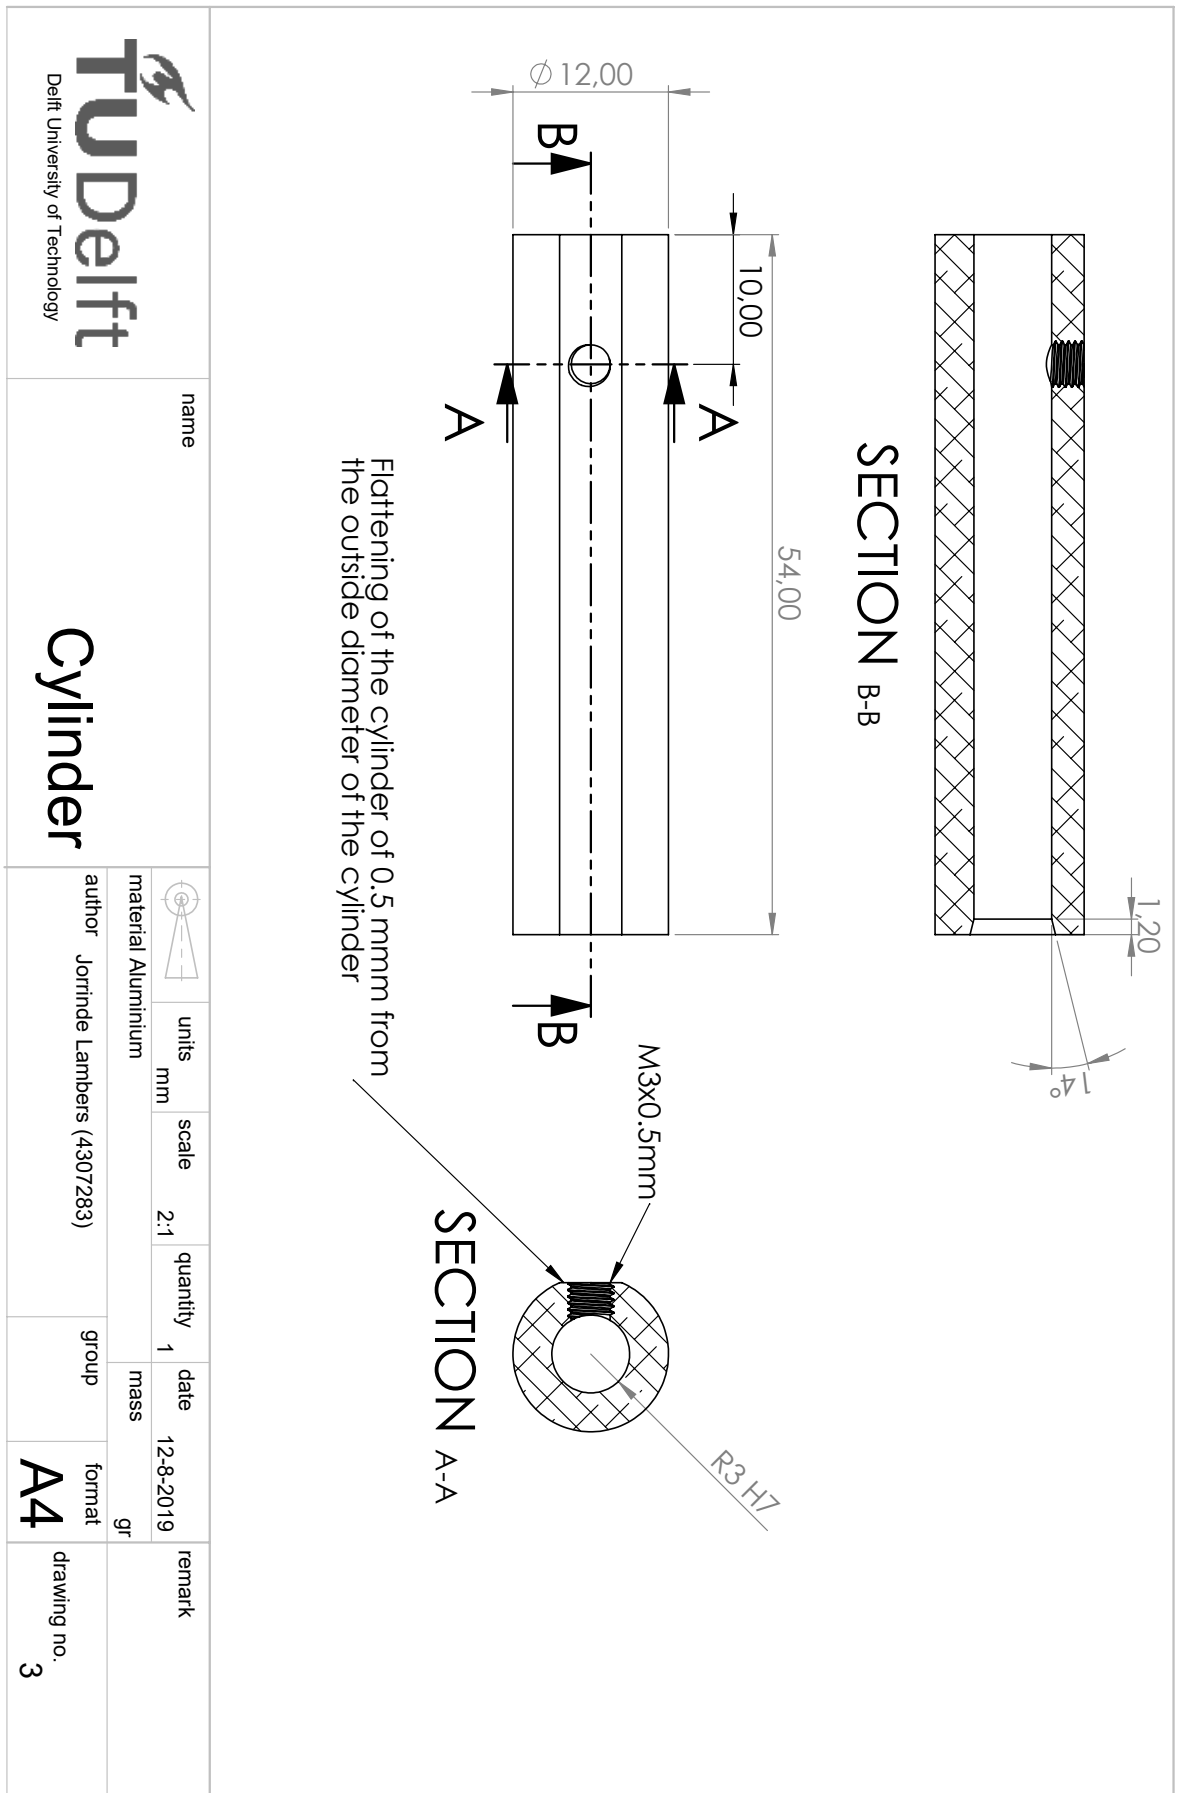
SolidWorks drawing of component number 3: Cylinder.
